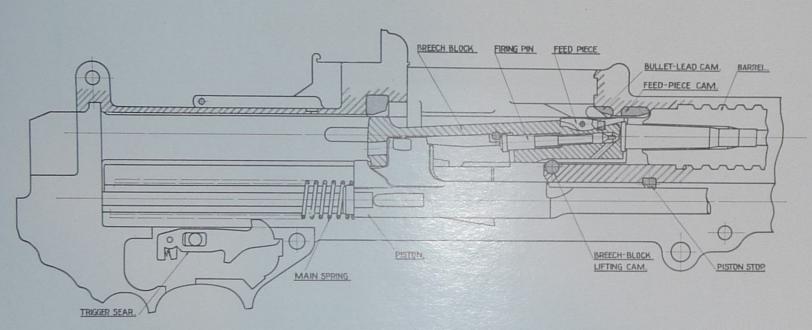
Breech Block and Piston partly recoiled. Breech Block unlocked.
